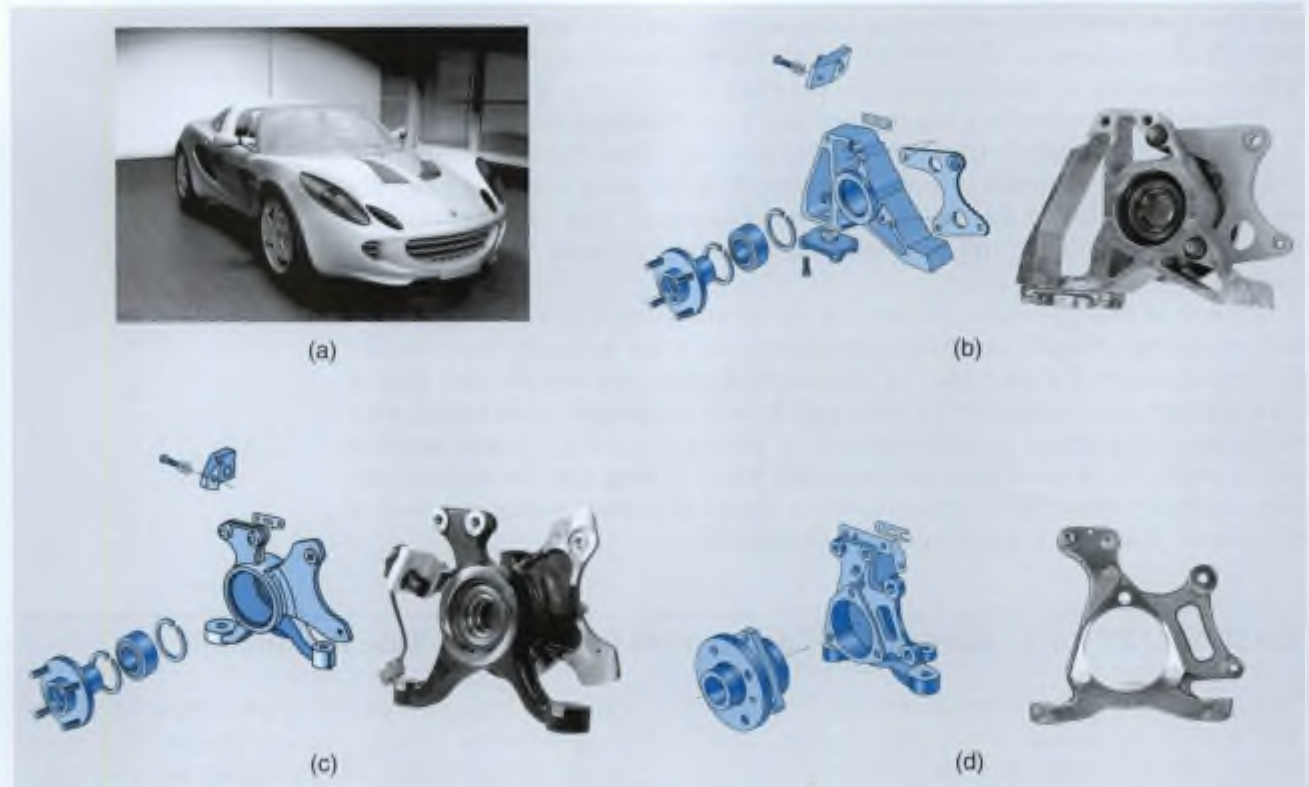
(a) The Lotus Elise Series 2 automobile; (b) illustration of the original design for the vertical suspension uprights, using an aluminum extrusion; (c) retrofit design, using a steel forging; and (d) optimized steel forging design for new car models. *Source:* (a) Courtesy of Fox Valley Motorcars; (b) through (d) Courtesy of American Iron and Steel Institute.
